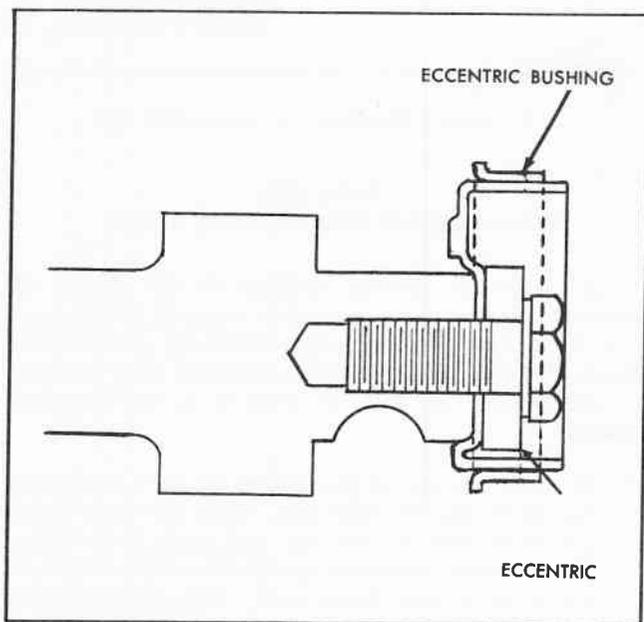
1957 Fuel Pump Eccentric and Bushing
